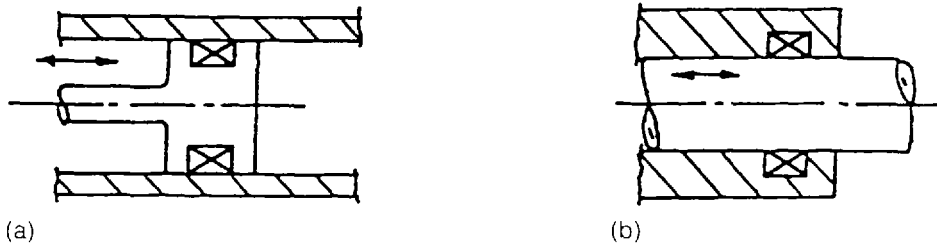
Illustration of the seal gland locations for (a) dynamic piston and (b) rod seal applications.
